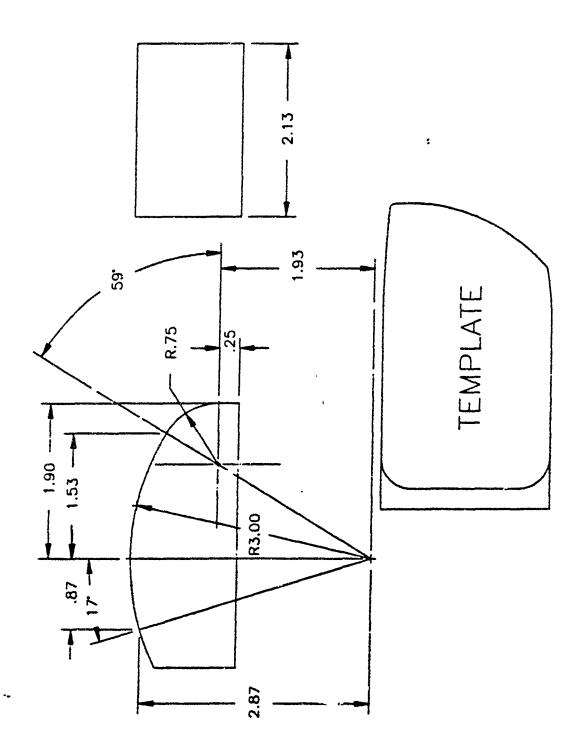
THERMOPORMED LENS MOLD DESIGN/PATTERN
